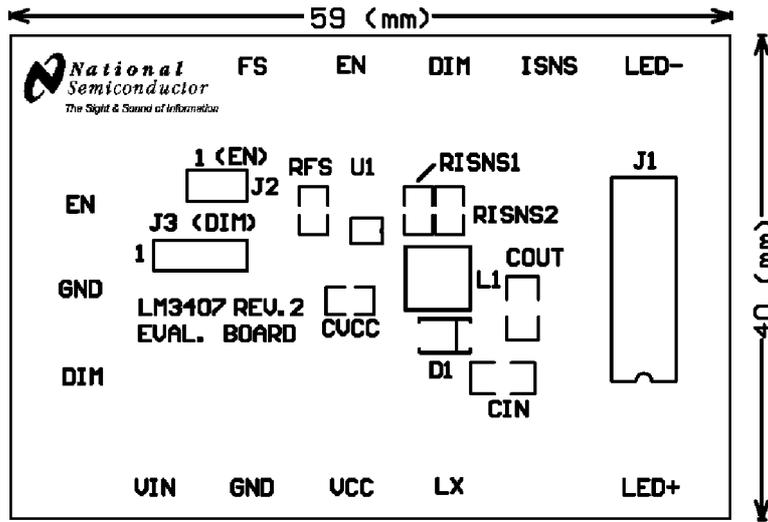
LM3407 Evaluation Board PCB Top Overlay
